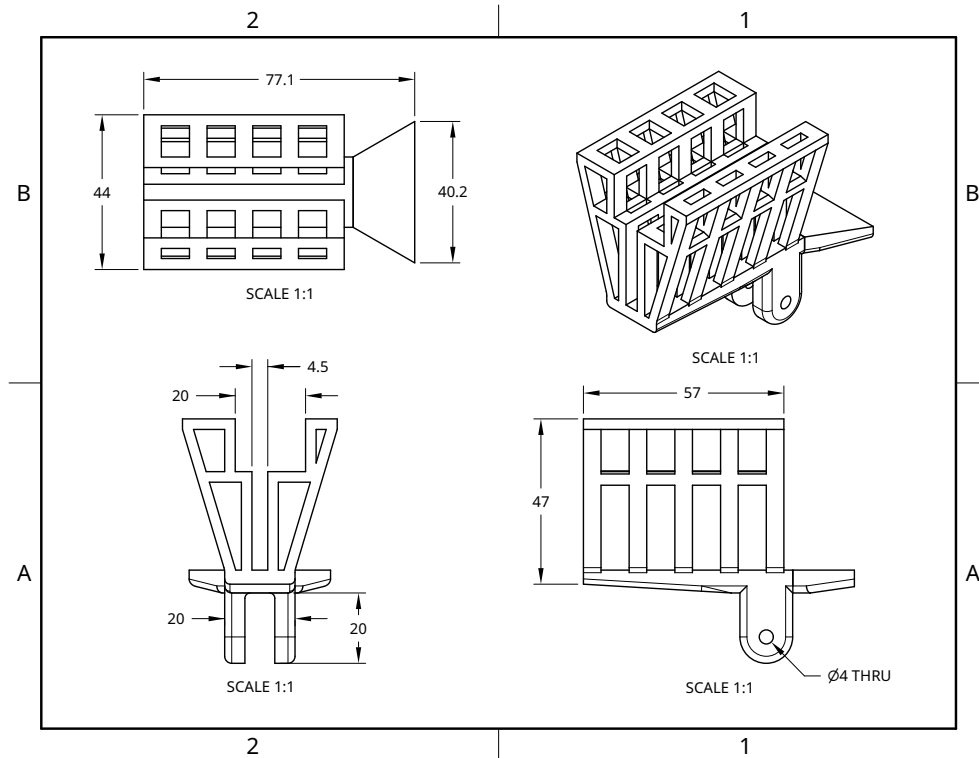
CAD drawing of the cage component of the catapult launcher. All quantities are given in millimetres.
